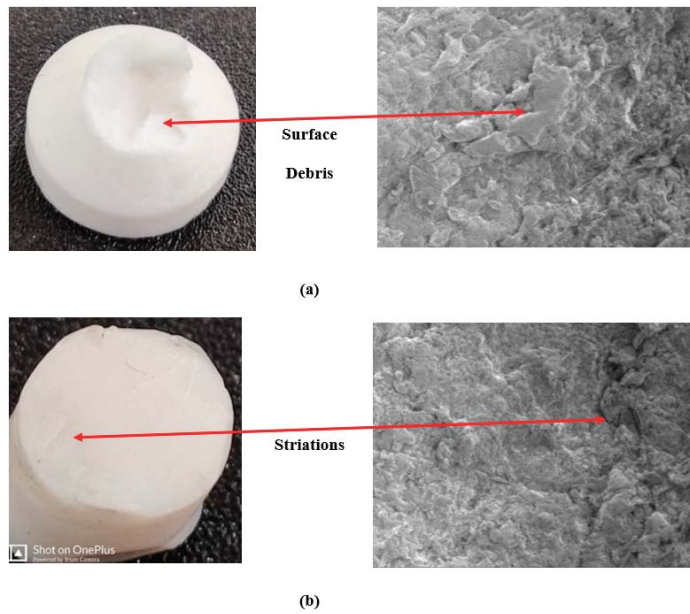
(a) Crescent shaped edge. (b) fractured surface for lower fretting depth.
